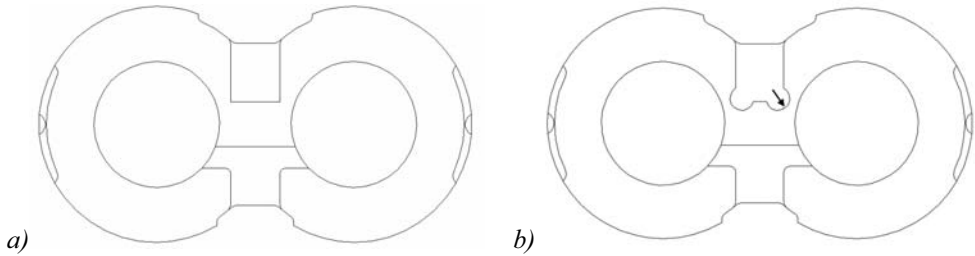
Alternatives considered for the design of the grooves manufactured on the bearing blocks
